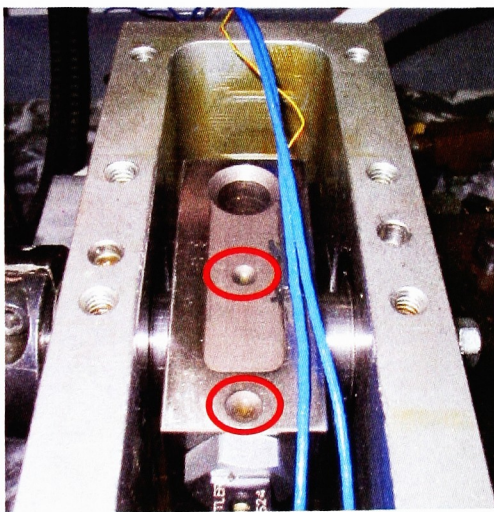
Dimples in Bushing Block to Accommodate Ceramic Ball Bearings
